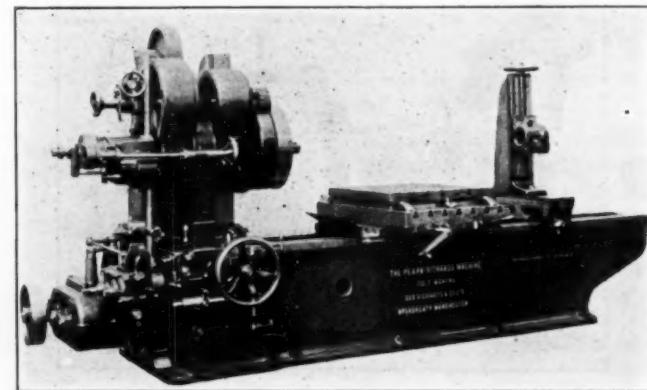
SURFACING, BORING, MILLING, DRILLING AND TAPPING MACHINE
